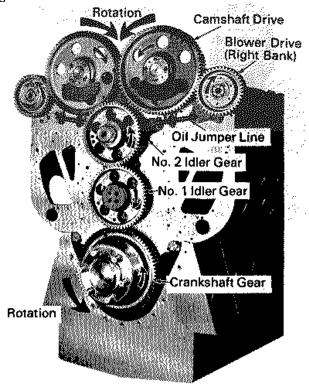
Camshaft Gear Train (Left-Hand Rotation Engine)
